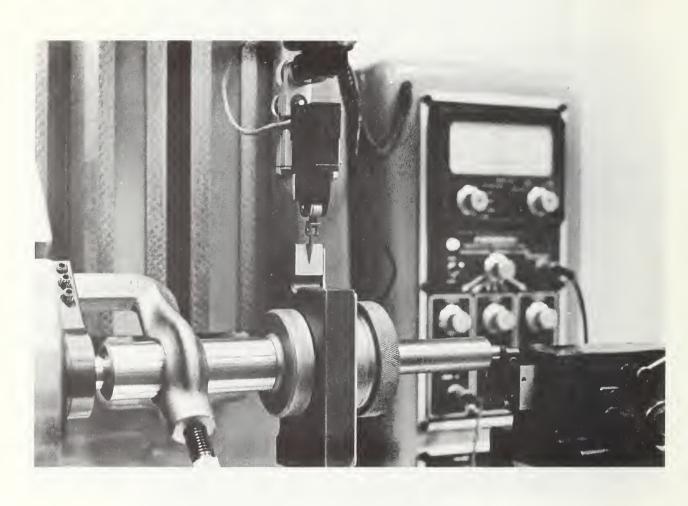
Check for Parallelism between Involute Axis and Reference Axis of Measuring Machine
